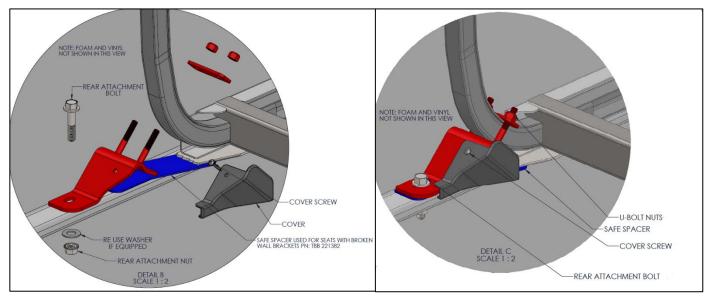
Installation with Safe Spacer (Driver's Side Shown) – 26 Inch, 36 Inch, and 39 Inch Seats
